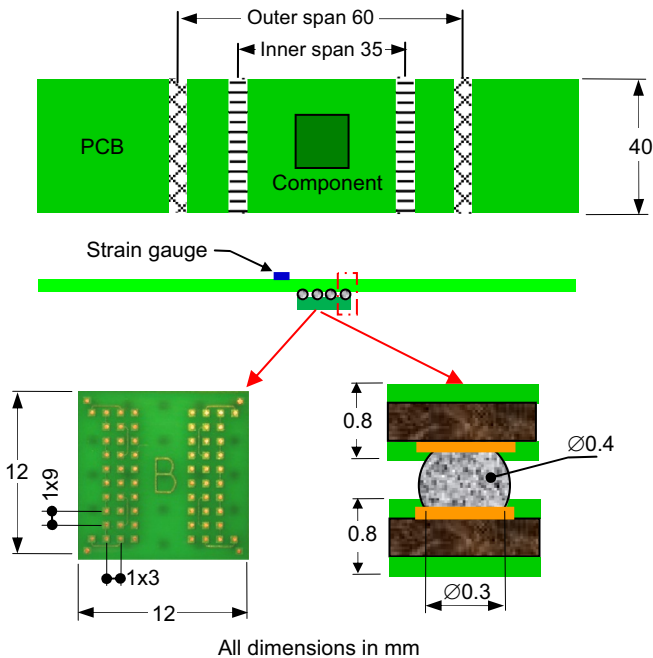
Test specimen for characterising the fatigue resistance of solder joints at high cyclic frequency.
